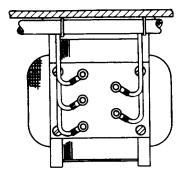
Transformers for Small Ringing Machines Such as KS-5319 and Similar Types — No. 14 Gauge and Smaller Wires
